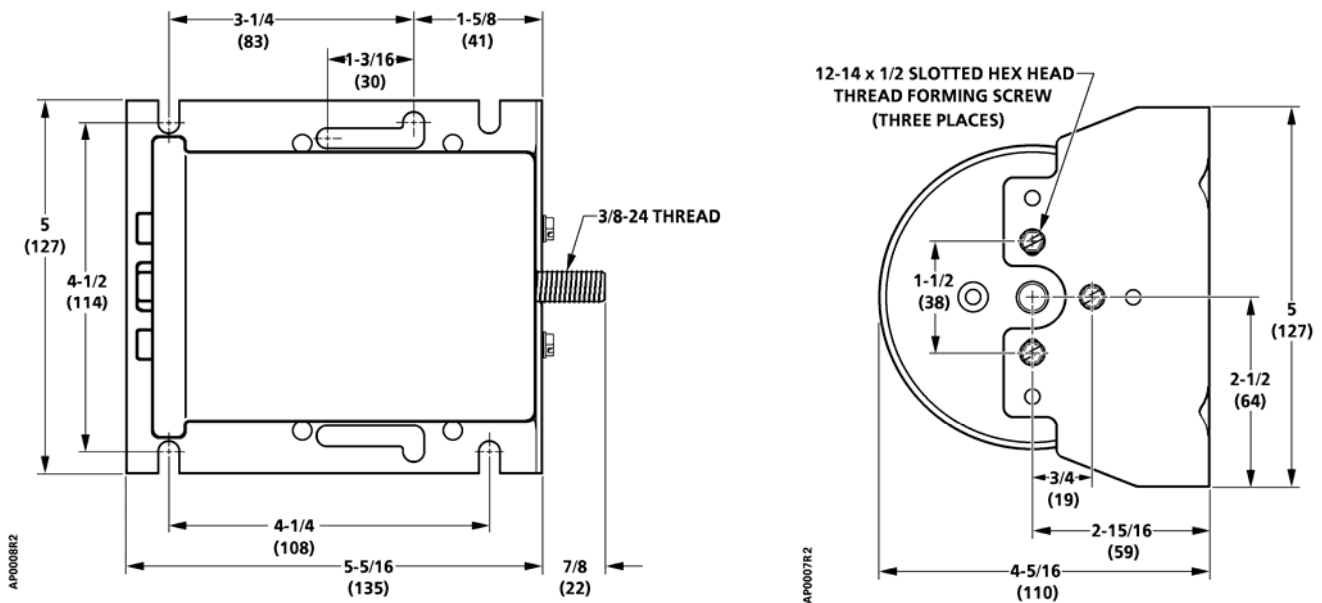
No. 3 Actuator with Fixed Mounting Bracket Dimensions. Dimensions are in Inches (Millimeters).
